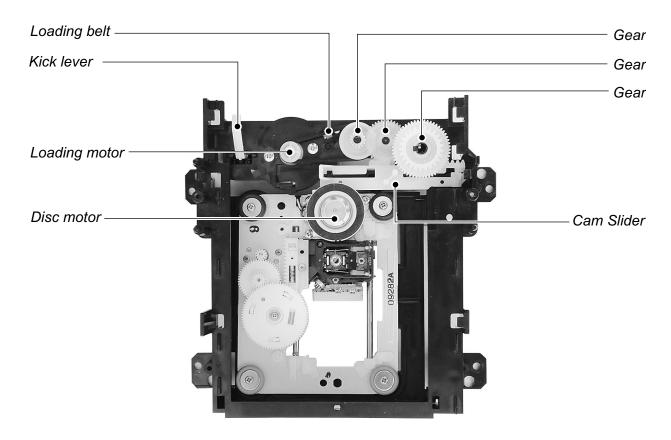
Mechanism chassis assembly (Internal side)
